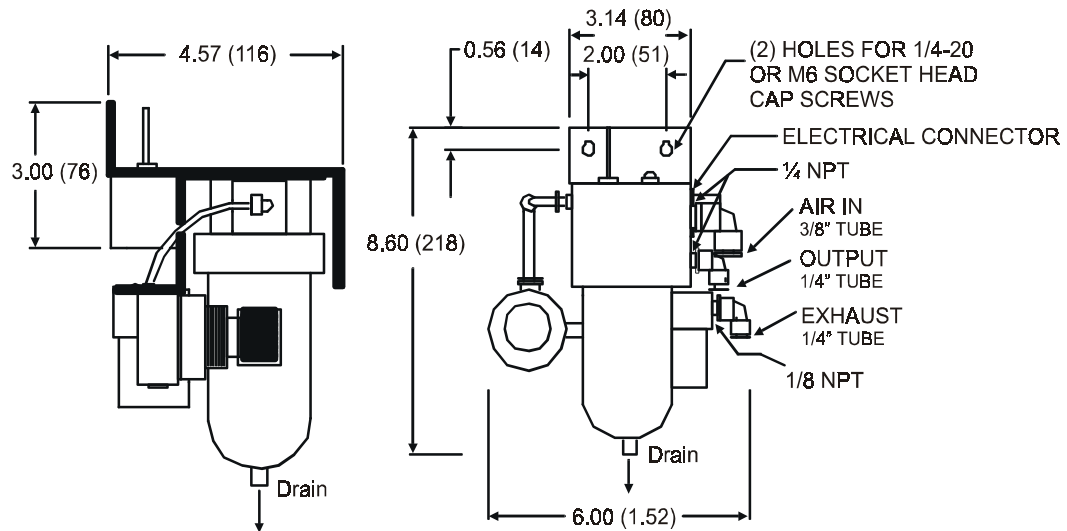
REMOTE PNEUMATIC ASSEMBLY DIMENSIONS
